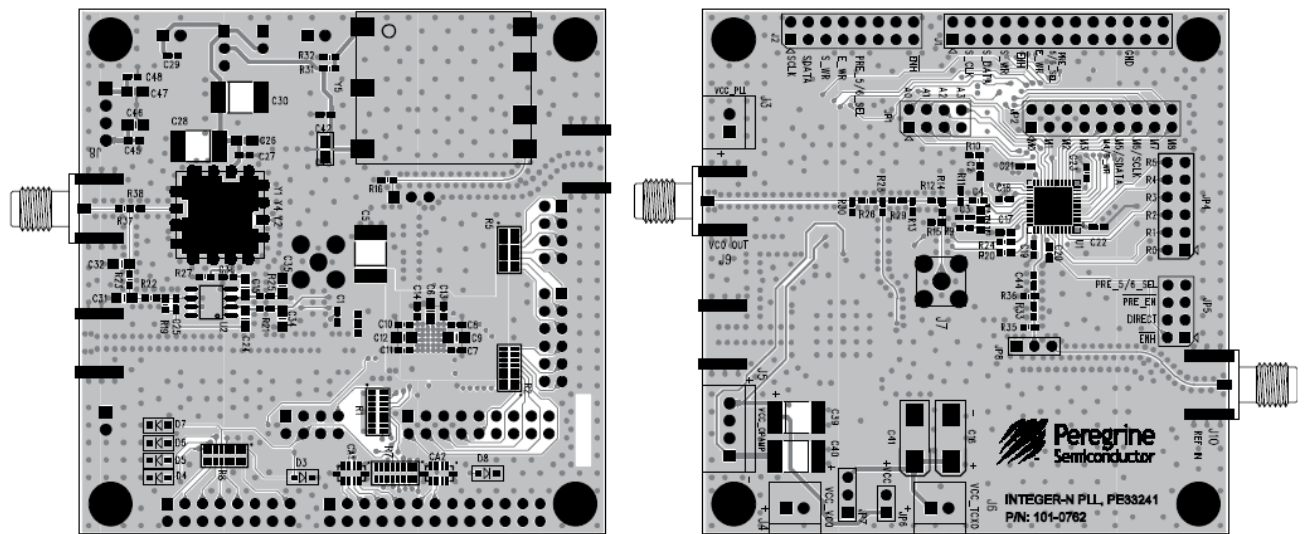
A schematic of the multilayer PE33241 development board (top – topside, bottom – bottom side).
